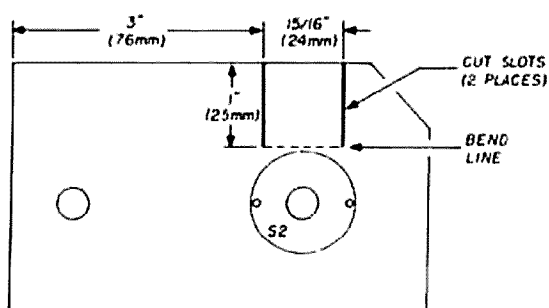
Collins 75A4 filter shield, showing modifications required for installing the crystal filter. Completed installation is shown in the photograph.
